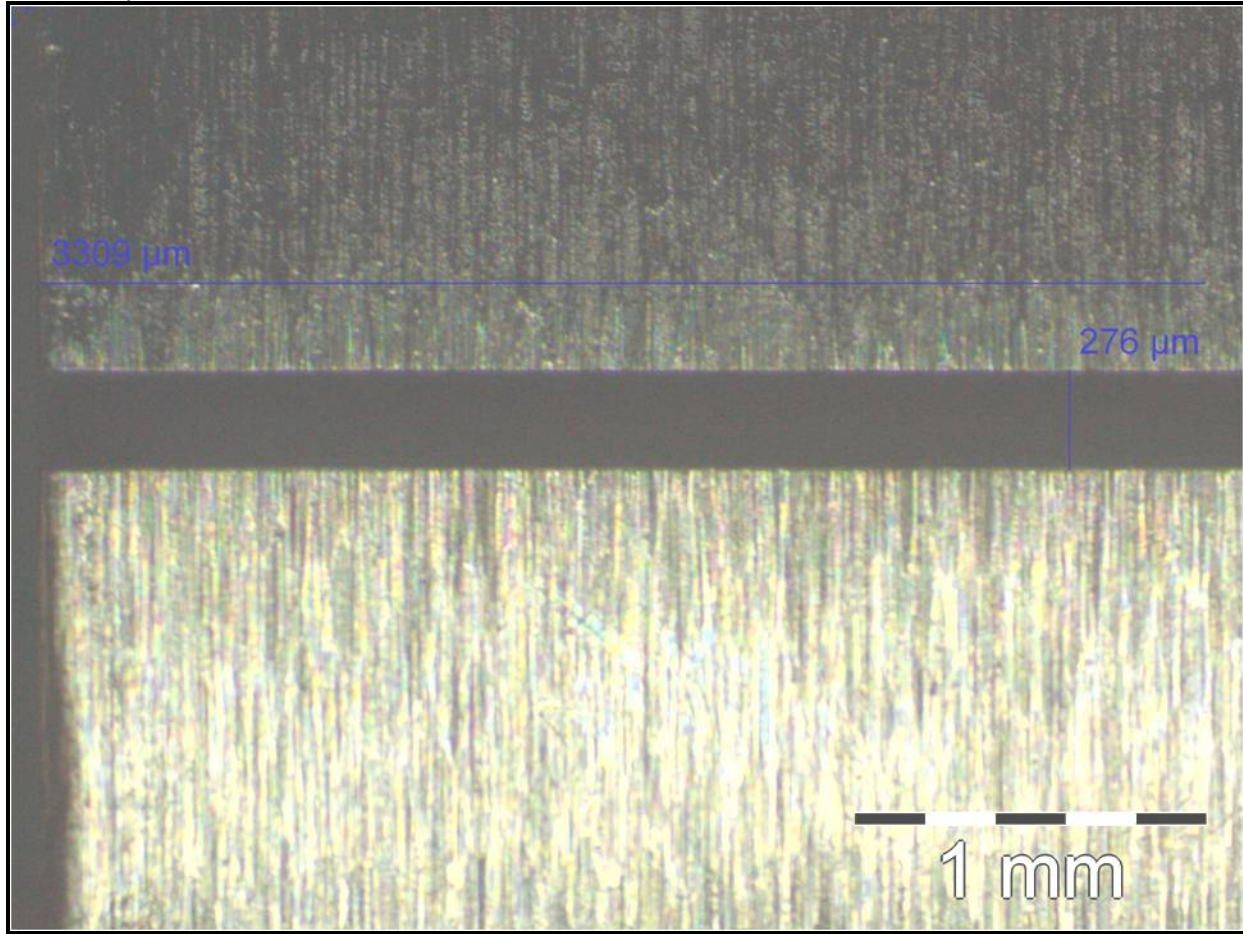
A trench approximately 700 μm deep was machined in this tungsten sample. The channel width is 276 μm .
